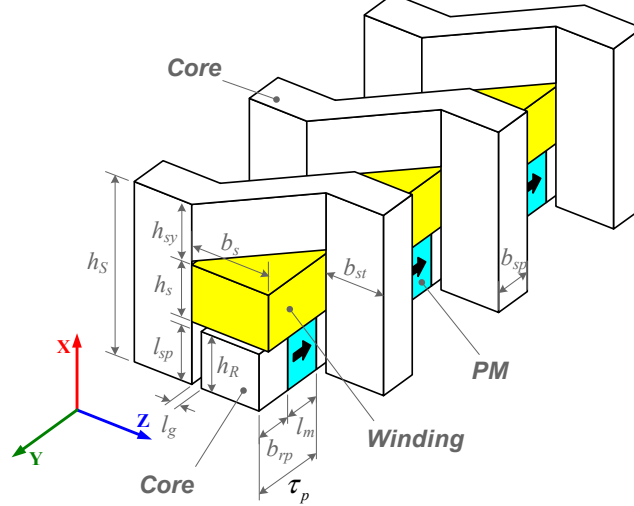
A linearized double-sided single winding flux-concentrating TFPM machine with C-cores
